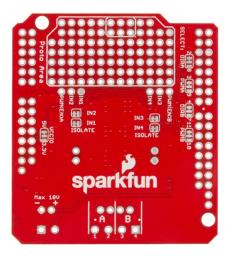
Example of not soldered jumpers and uncut traces on the Arduino shield.
